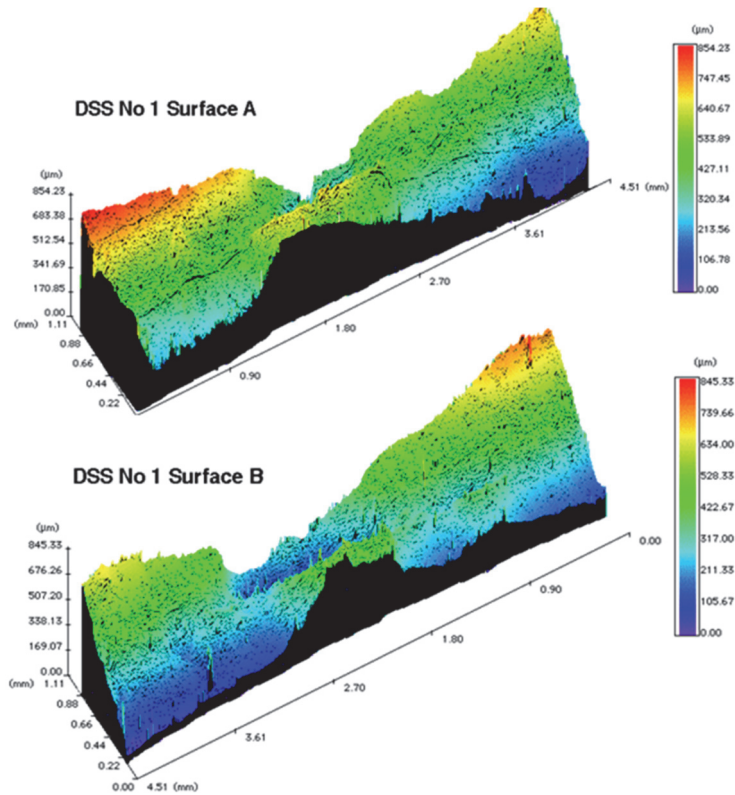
Perspective view of FRASTA topology for conjugate fracture surfaces from room temperature C-Notch specimen
